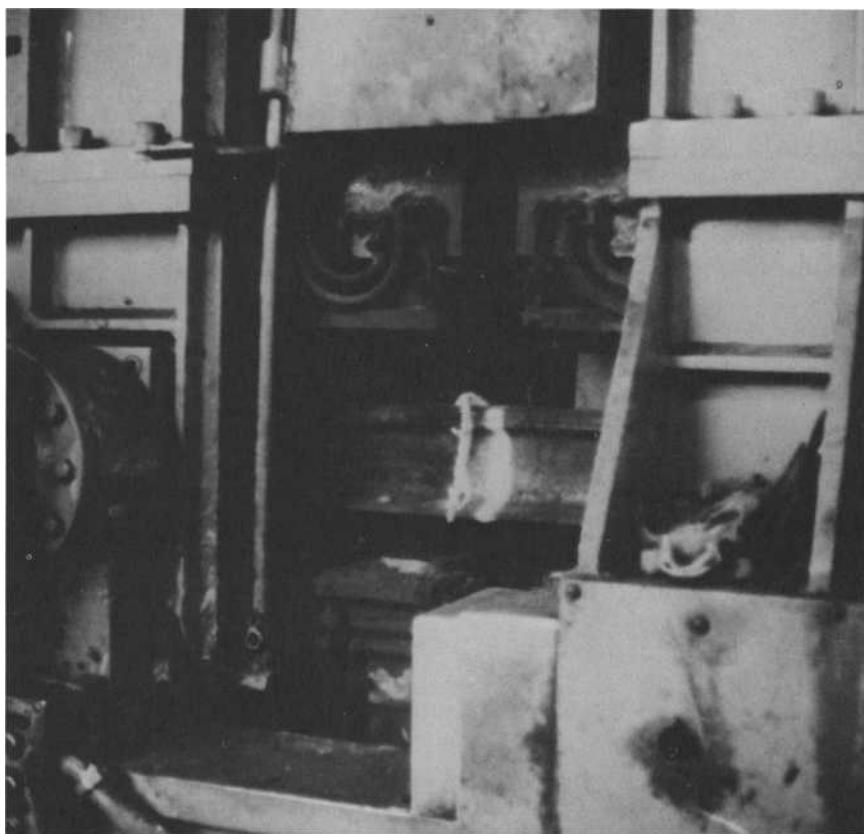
Plant flash weld showing sheared upset metal pushed off of the hot weld.
